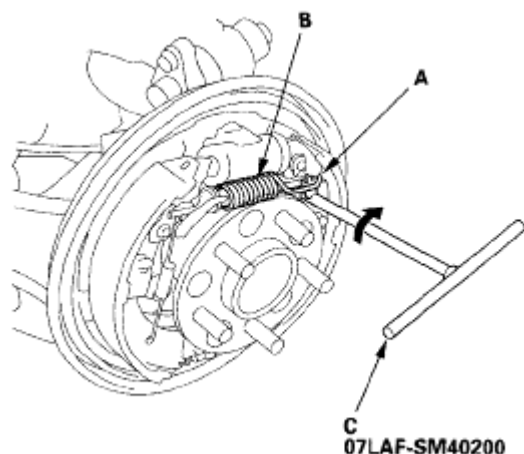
Identifying Hook End Of Upper Return Spring With Brake Spring Installer
